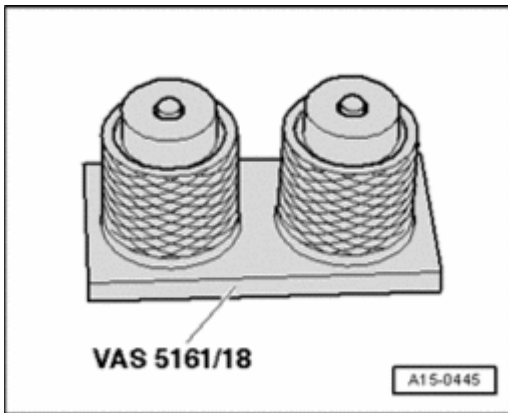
Identifying Installation Cartridge VAS 5161/8
